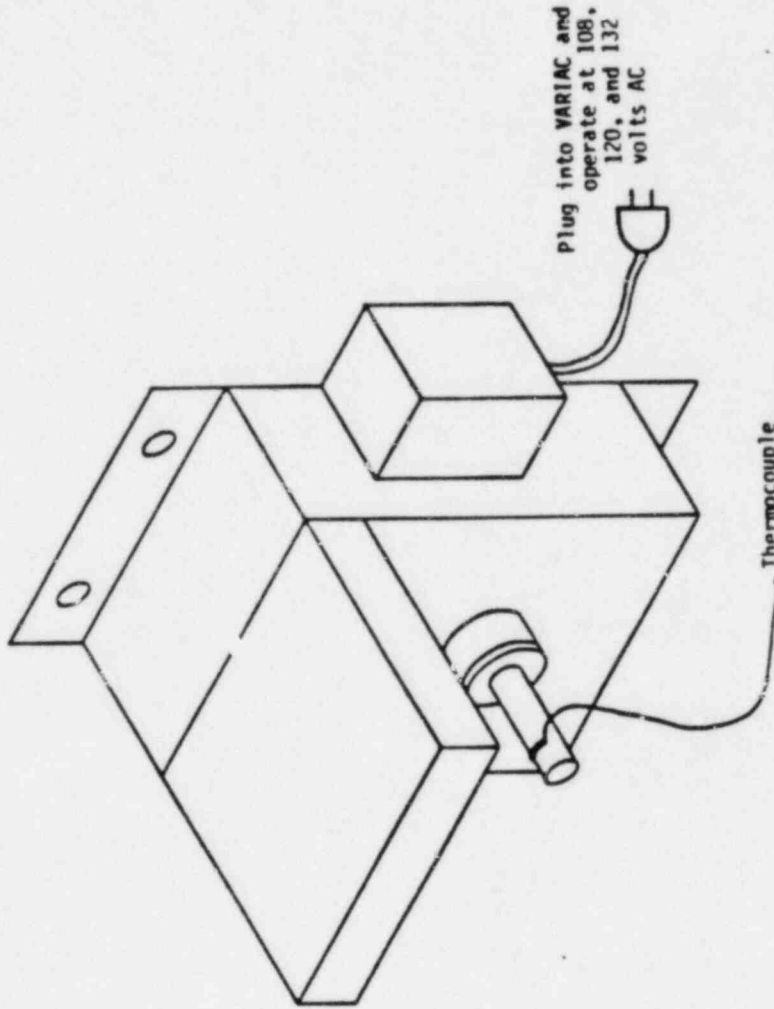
Installation of Hydrogen Ignitor Assembly in Test Chamber
